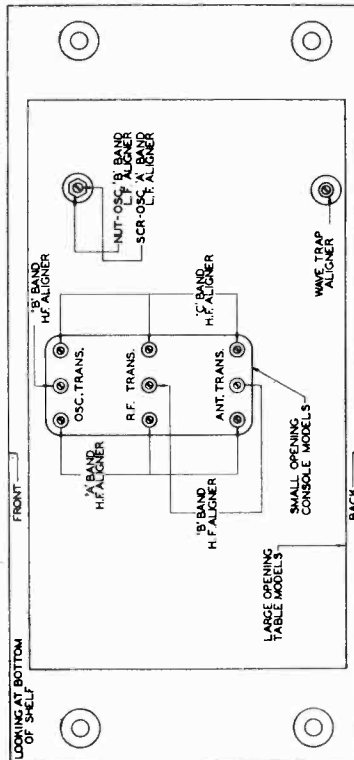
View Through Chassis Mounting Shelf Showing Adjusting Screws for R. F. Aligning Capacitors.
